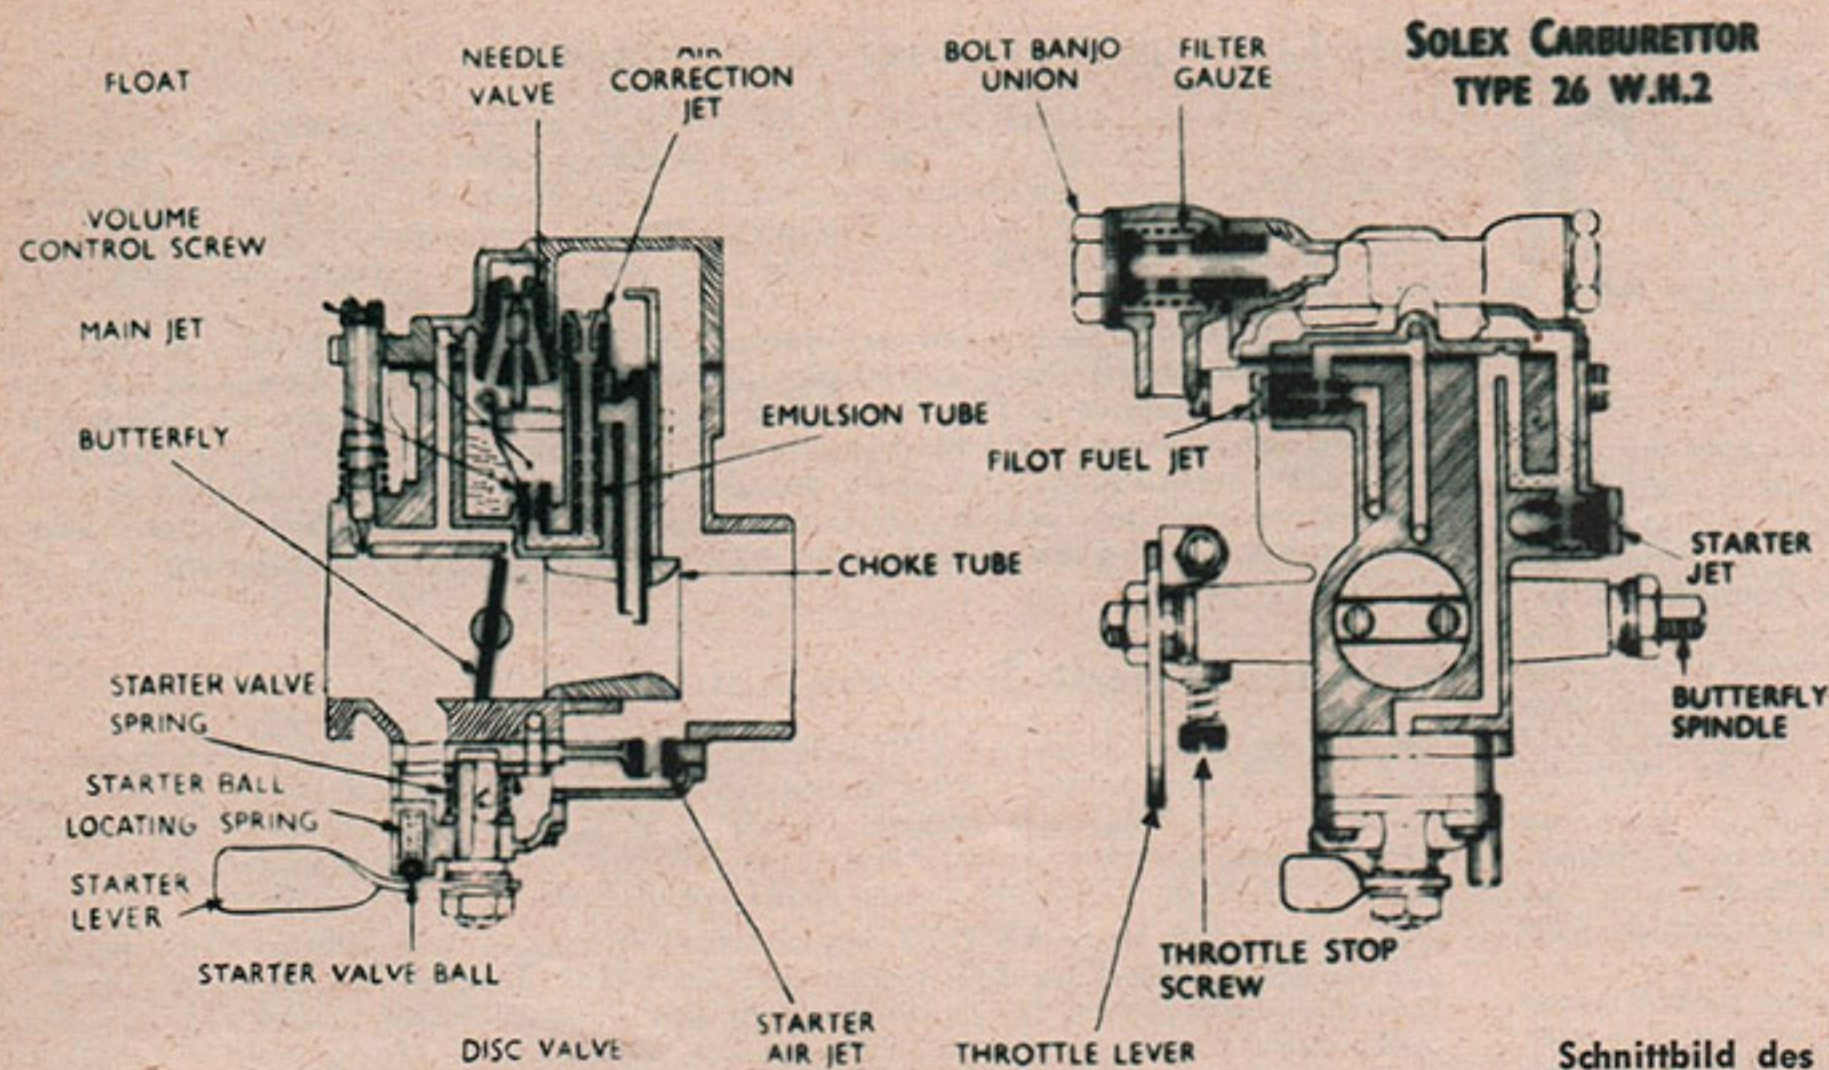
SOLEX CARBURETTOR TYPE 26 W.H.2
